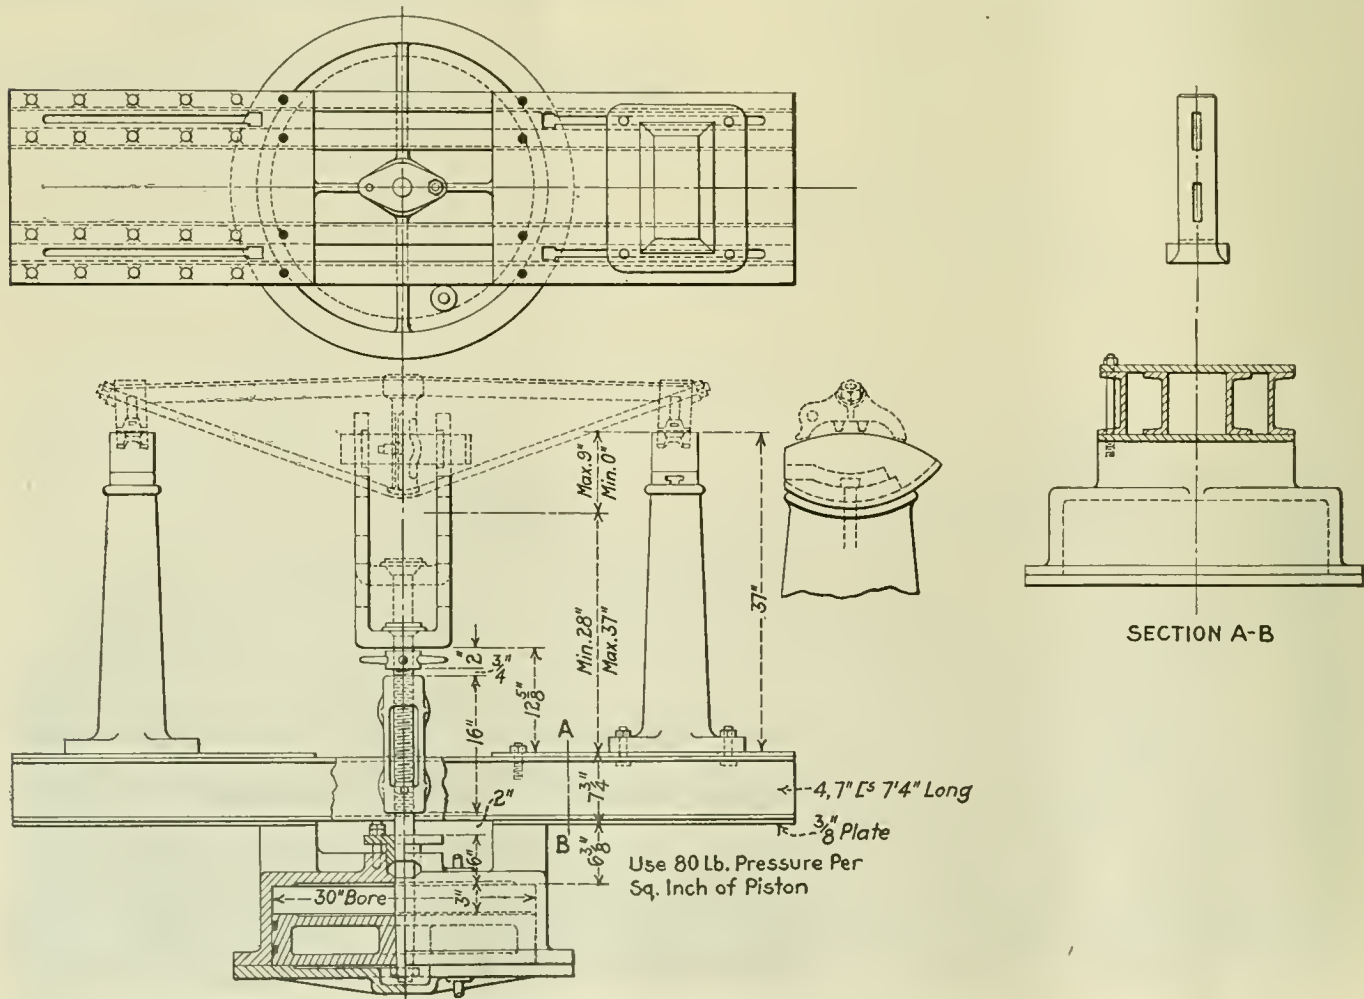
Brake Beam Testing Machine, 50,000 lb. Capacity
